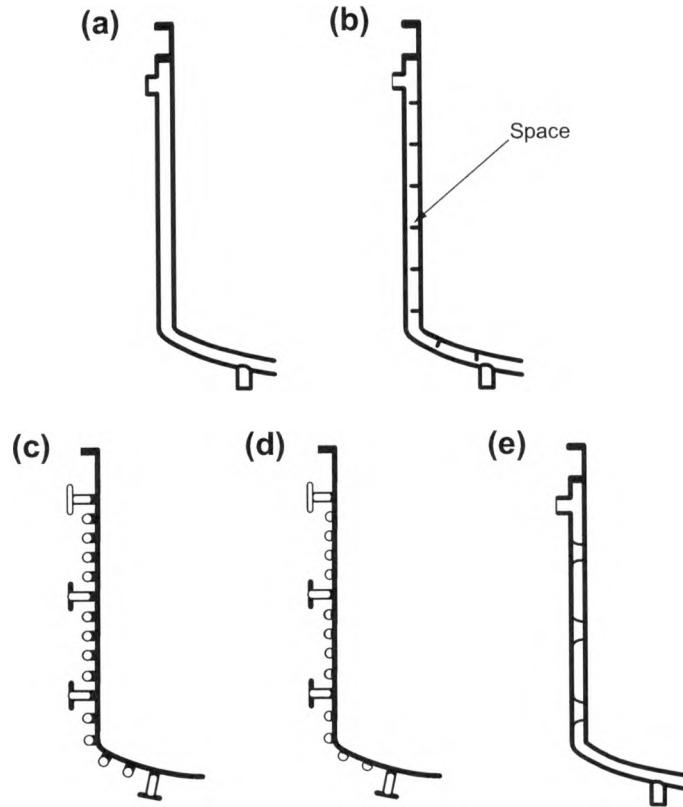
Types of Jacket Construction (a) Plain Jacket (b) Jacket with Spiral Baffle (c) Pipe Coil Welded to Shell (d) Half-Pipe Welded to Shell (e) Dimpled Jacket.
